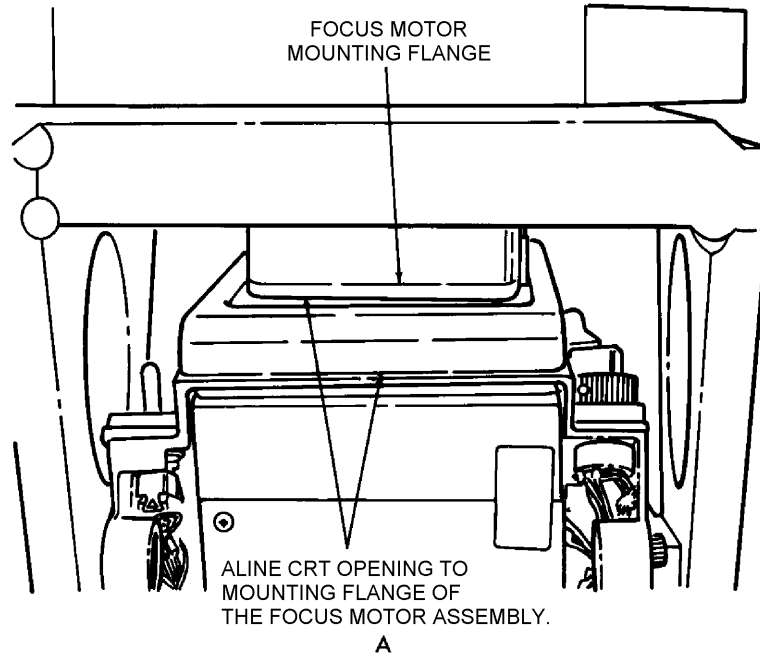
Control Panel Assembly Installation into Focus Motor Mounting Bracket Assembly
